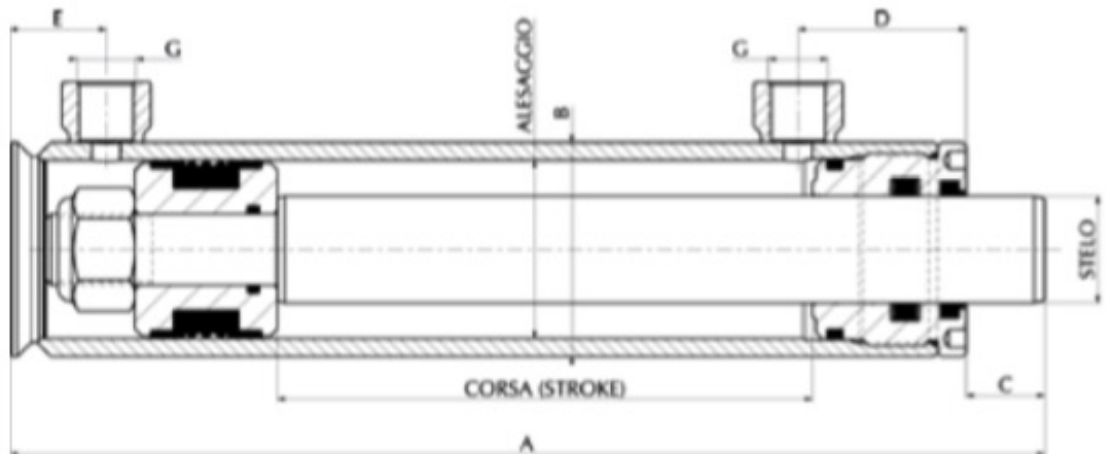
Hydraulic Cylinder with stroke=600mm
